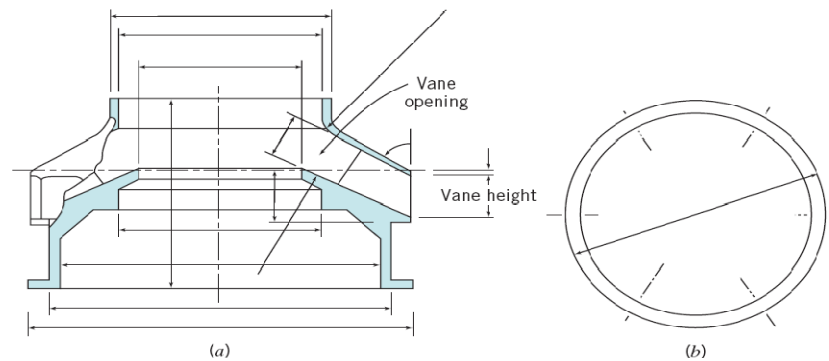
shows a casting used in a gas turbine jet aircraft engine. This part is typical of those produced by both casting and machining processes for use in gas turbine engines and auxiliary power units in the aerospace industry—cylindrical parts created by rotating the cross section around a central axis. The vane height on this part is a critical quality characteristic.
